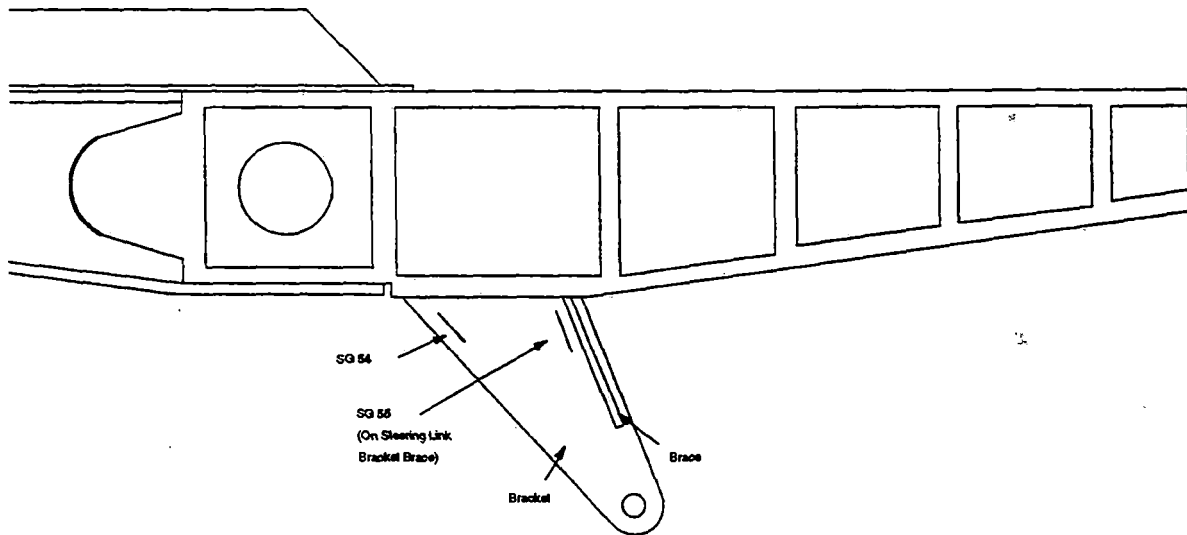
Detail B, Split Ramp Car - Strain Gage Locations.
